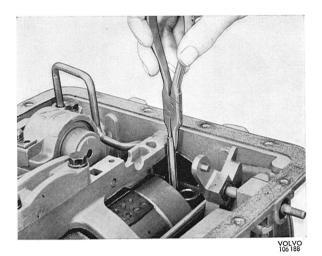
Removing converter inlet and outlet tubes using needle-nose pliers
